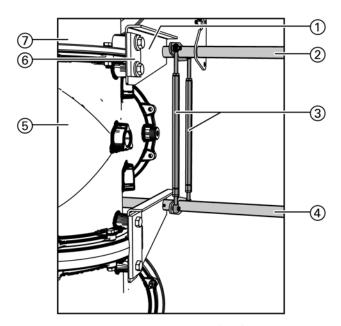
Fixing of operating shafts ② , ④ at the busbar housing
